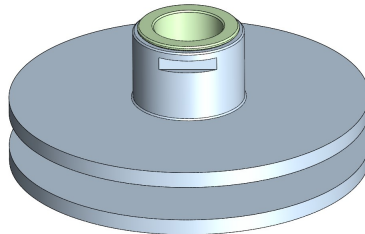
Rotor assembly with the flywheel in gray and the squirrel cage in green.
